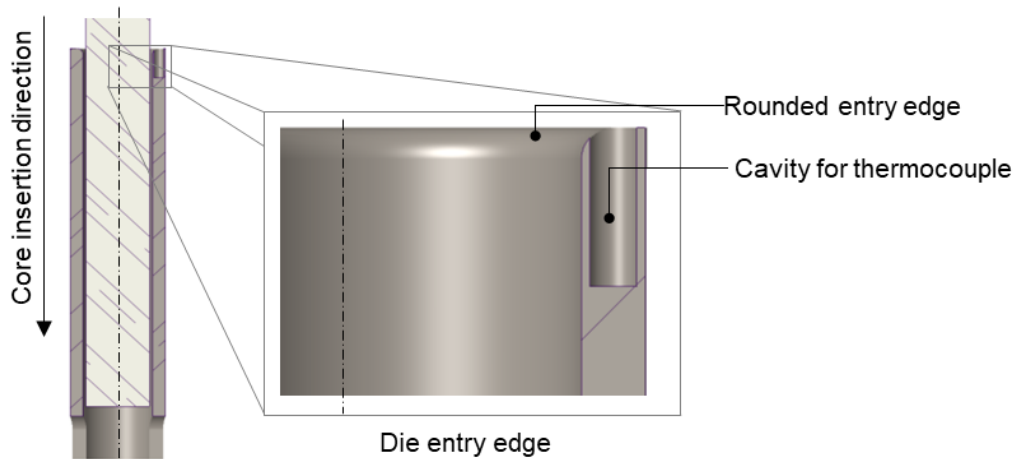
Cross-section of the die-core assembly showing rounded entry edge and the cavity for a thermocouple.
